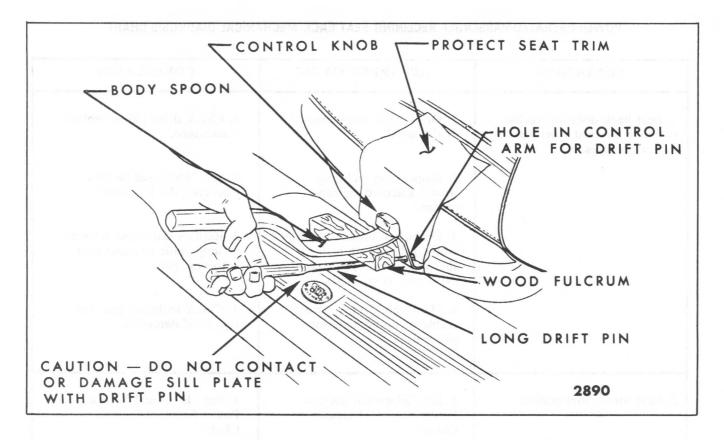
Front Seat Adjuster Control Knob - Removal - Side Control Knob Shown (Front Control Knob Typical)
